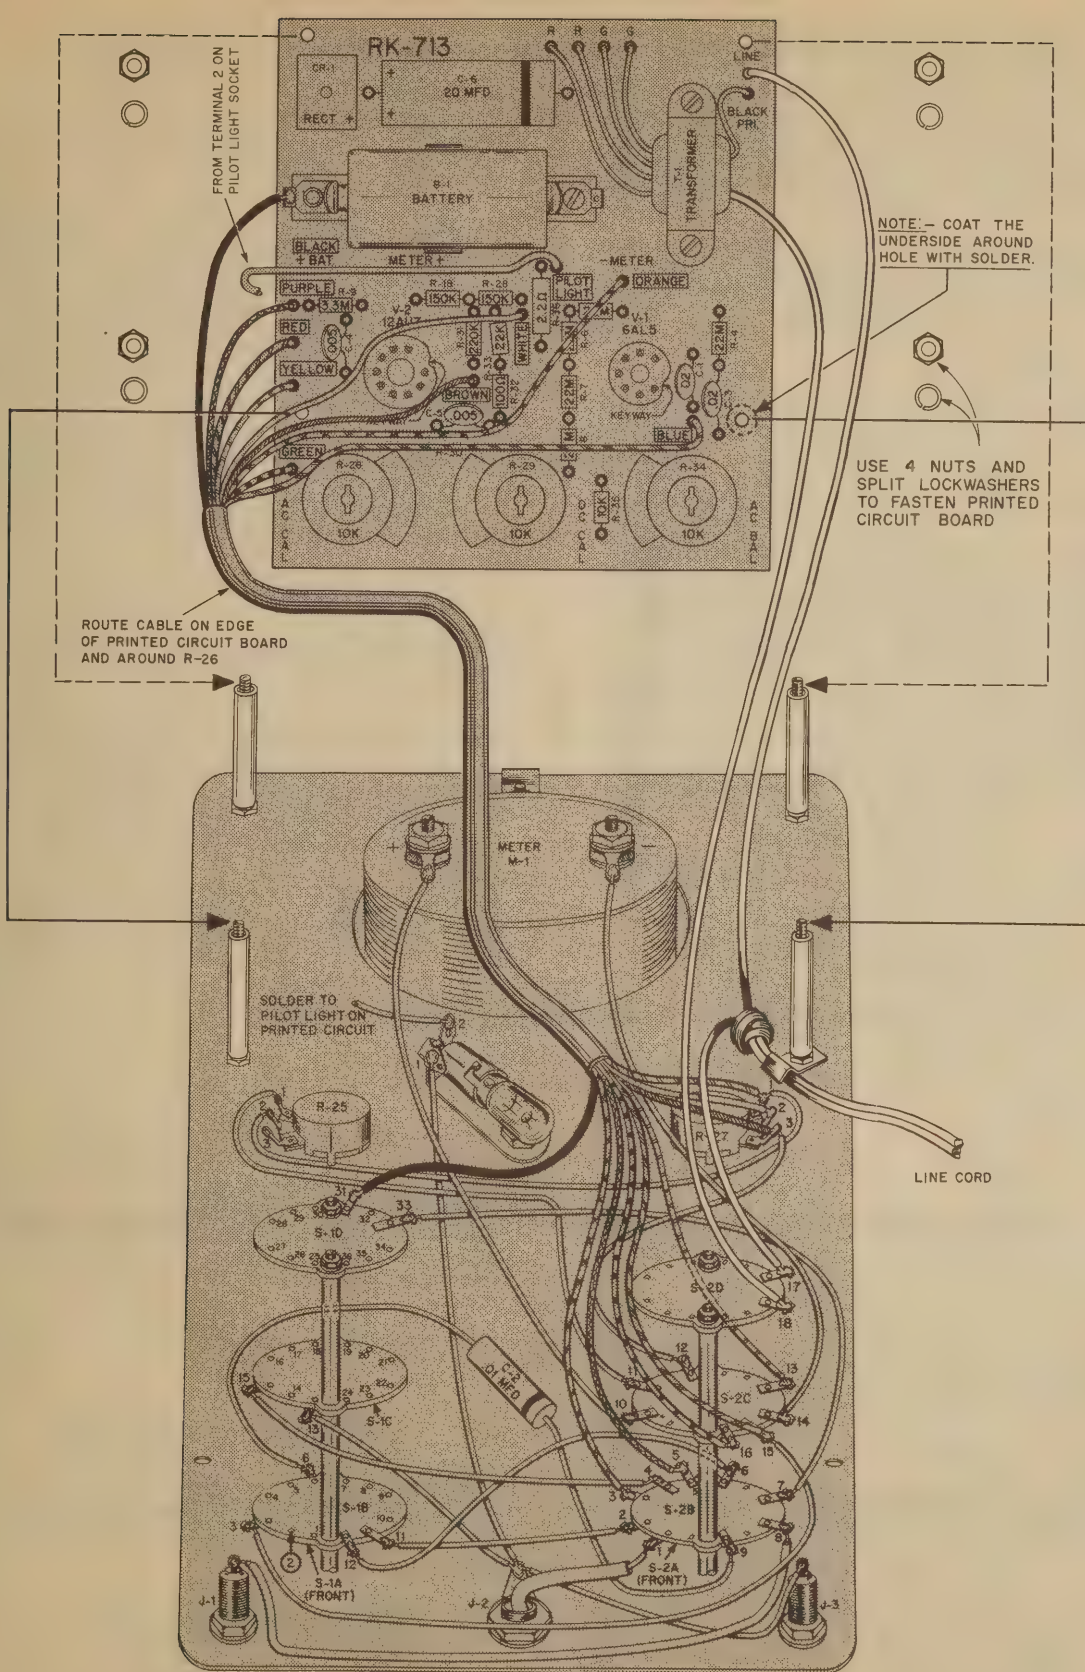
HOW TO MOUNT THE PRINTED CIRCUIT BOARD
